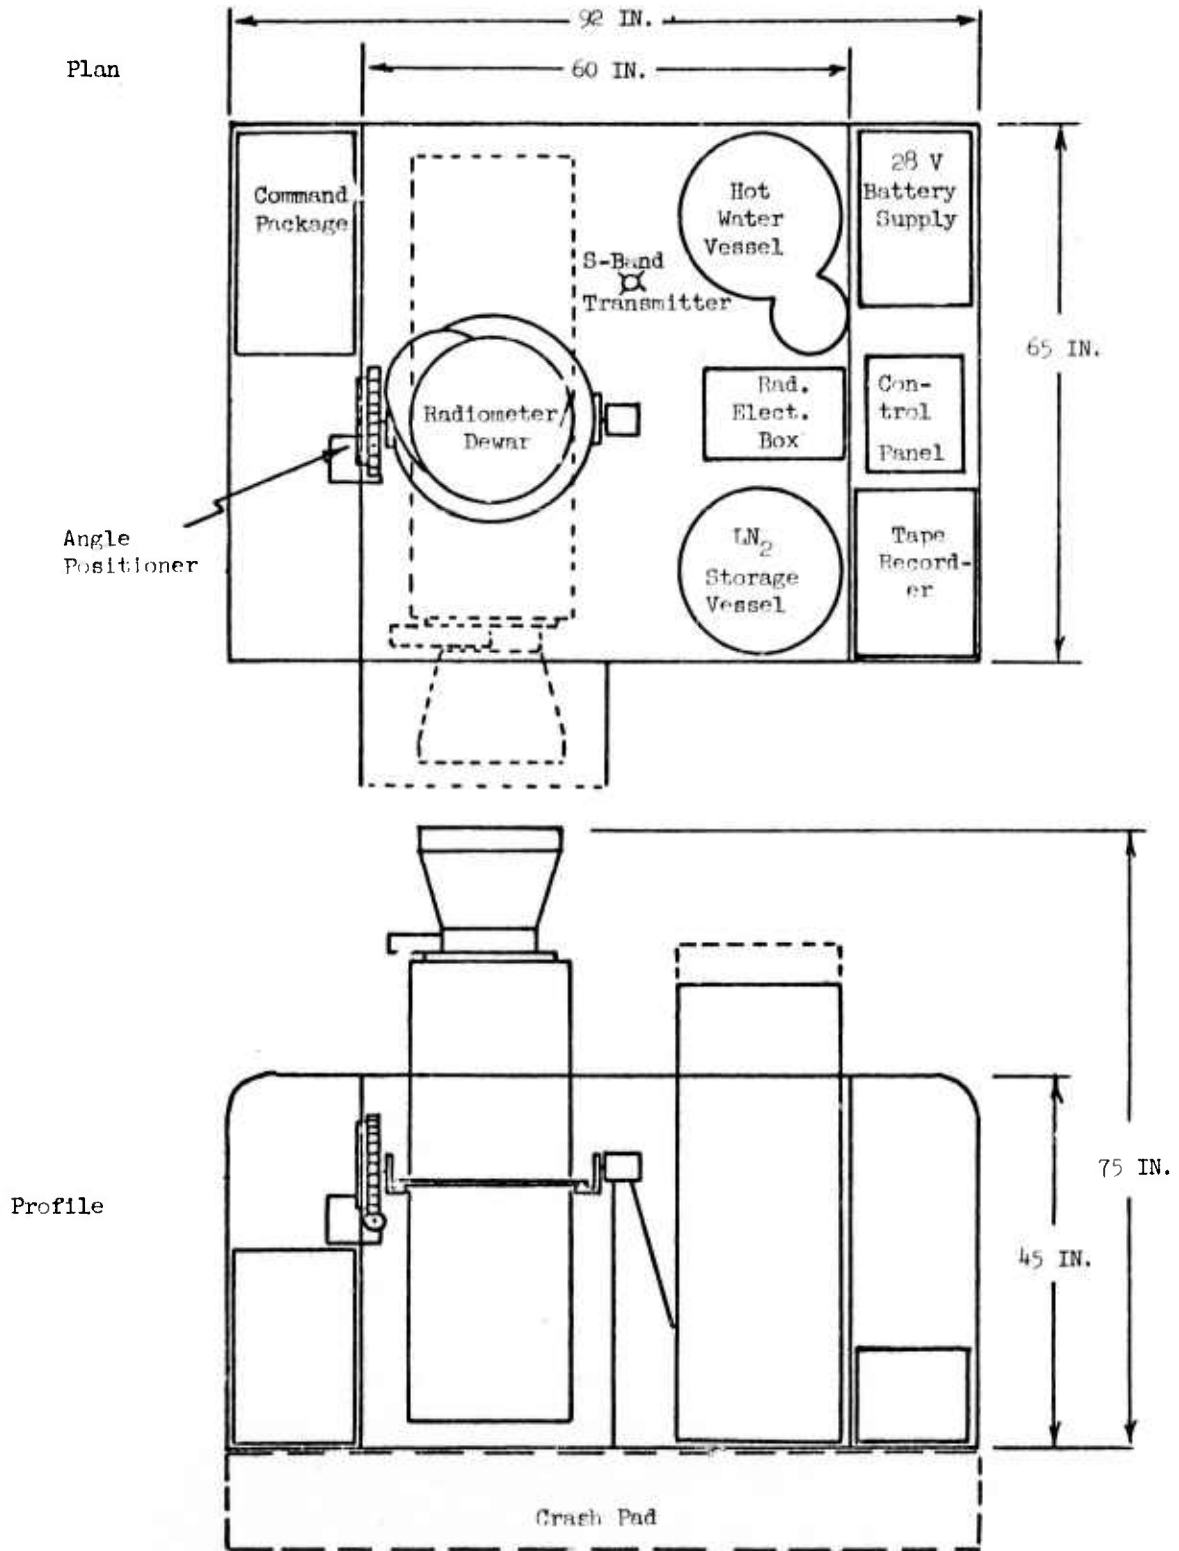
Location and Profile of the Radiometer Flight Package
